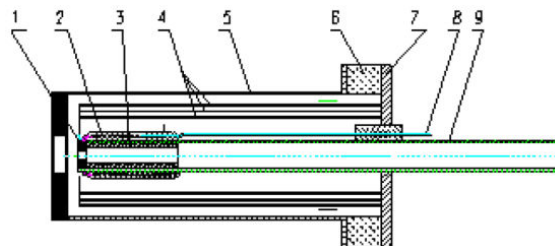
The schematic of the hollow cathode; 1-the orifice plate, 2-heater, 3-LaB₆ insert, 4-thermal shield, 5-keeper, 6-isolator of ceramic, 7-mounted flange, 8- the cable of heater, 9-tube
